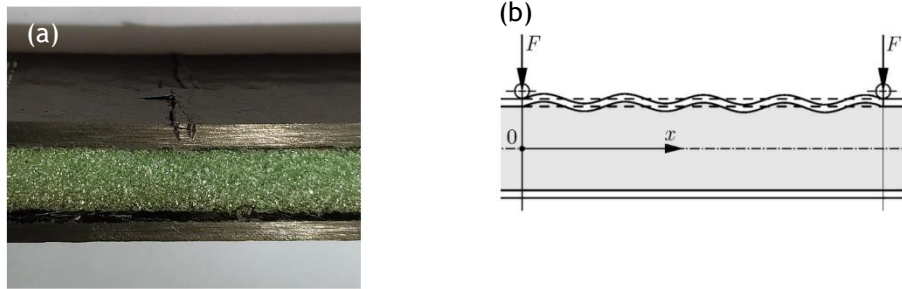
Sandwich compressive failures, a-Face compressive failure, b- Face wrinkling failure or local buckling (adapted from [64])
